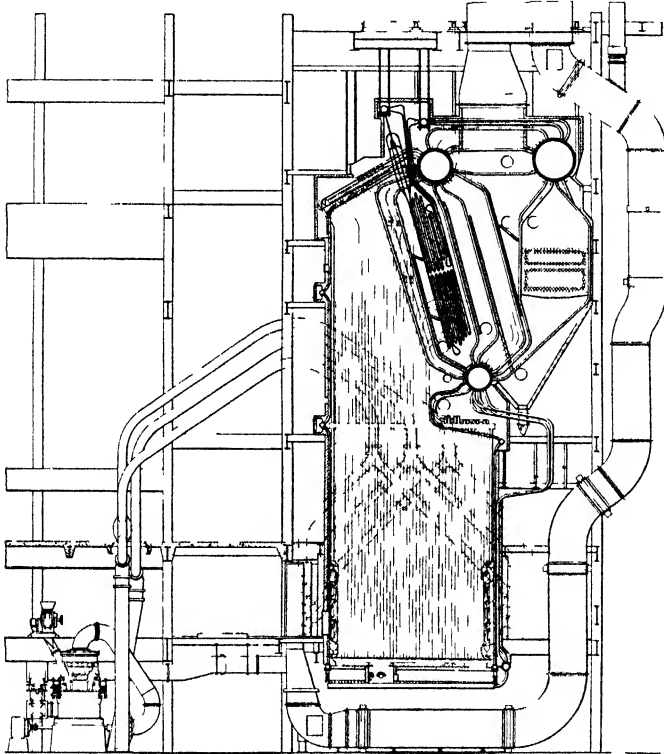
Three-drum bent-tube high-pressure steam generator (*Combustion Engineering Co., Inc.*)
